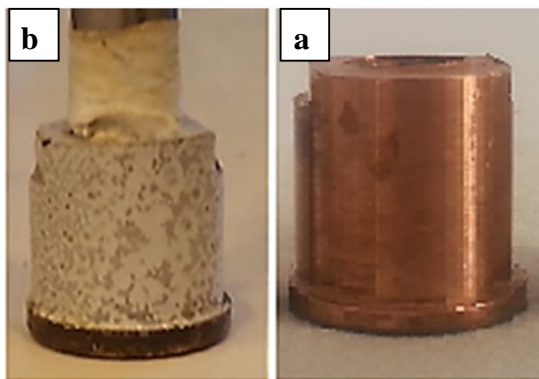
(a) Copper tool before coating (b) Copper tool after coating
